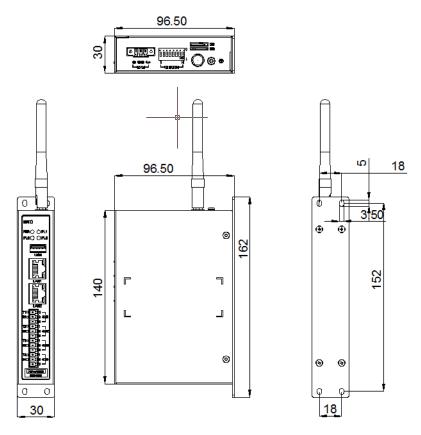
ECU-1251/1251V2 Chassis Dimensions
